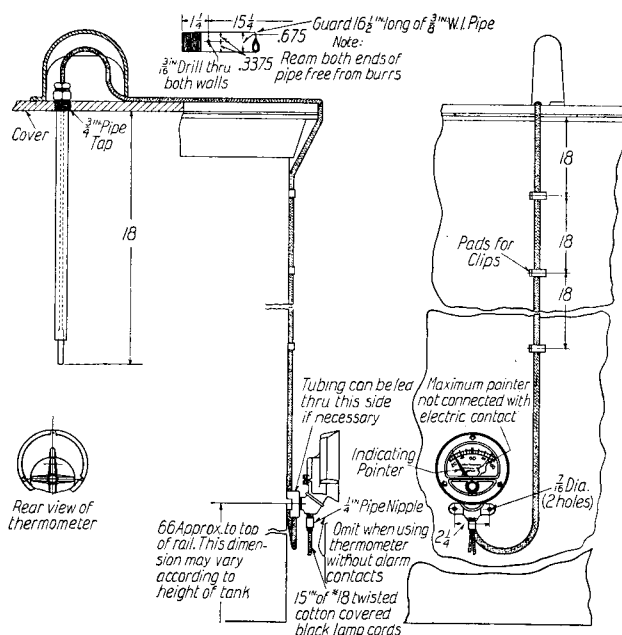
CROSS SECTION OF TRANSFORMER SHOWING MOUNTING OF THERMOMETER WITH FLEXIBLE TUBE AND ALARM CONTACTS
